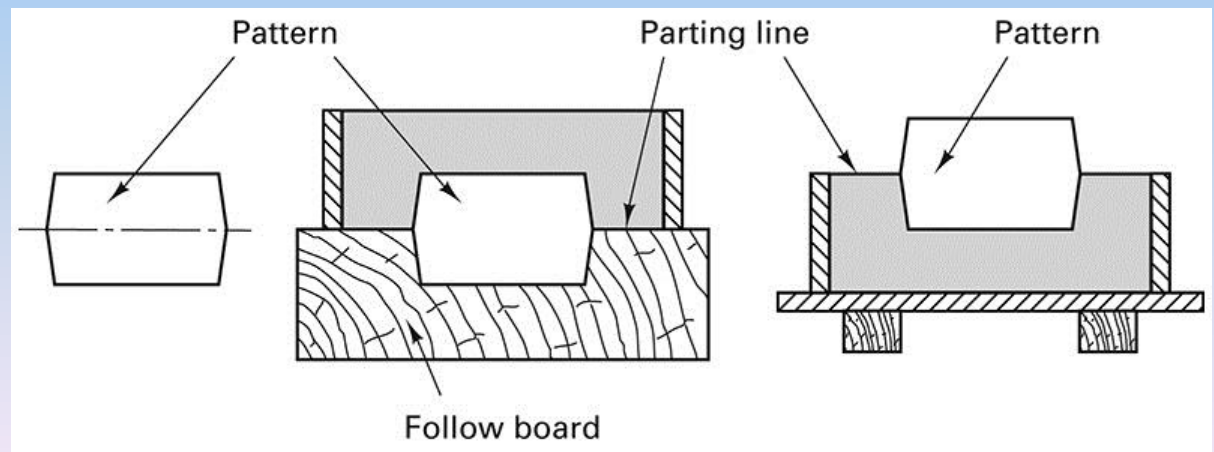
(Below) Method of using a follow board to position a single-piece pattern and locate a parting surface. The final figure shows the flask of the previous operation (the drag segment) inverted in preparation for construction of the upper portion of the mold (cope segment).
